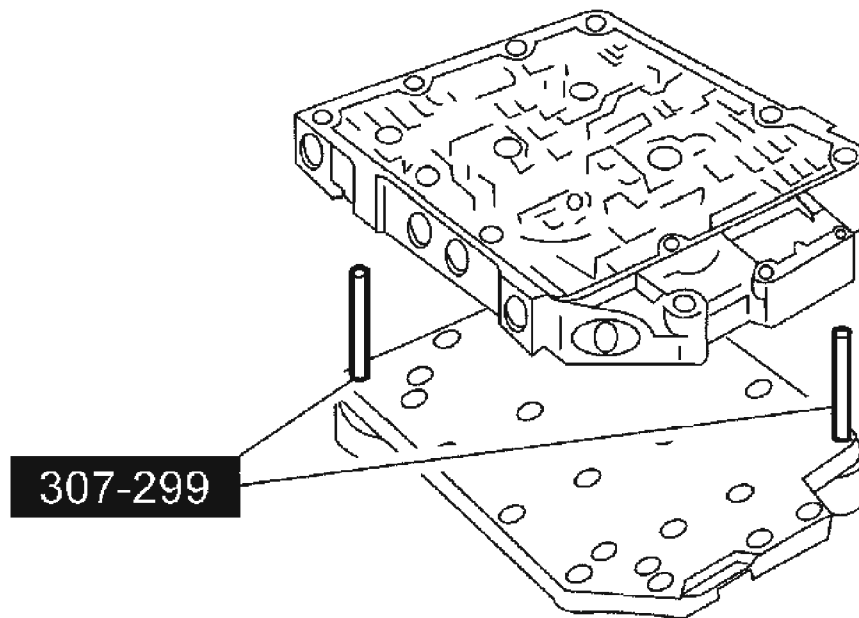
Installing Valve Body Separator Plate Gaskets And Valve Body Separator Plate
